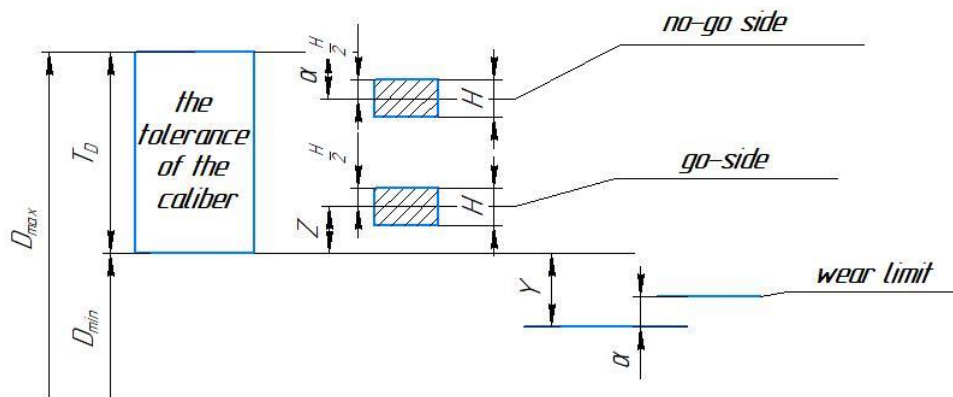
Is the layout of gauge tolerance limits for hole inspection
